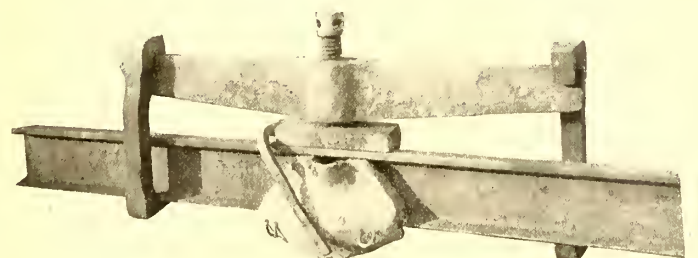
MOLDS AND CLAMPS READY TO WELD, POURING SIDE
